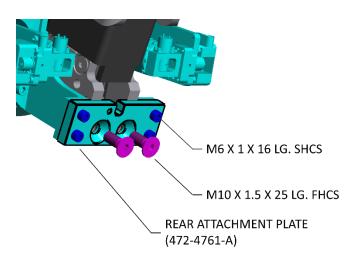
Attached to Lower Abdomen Rear Attachment with M6X16 SHCS.
